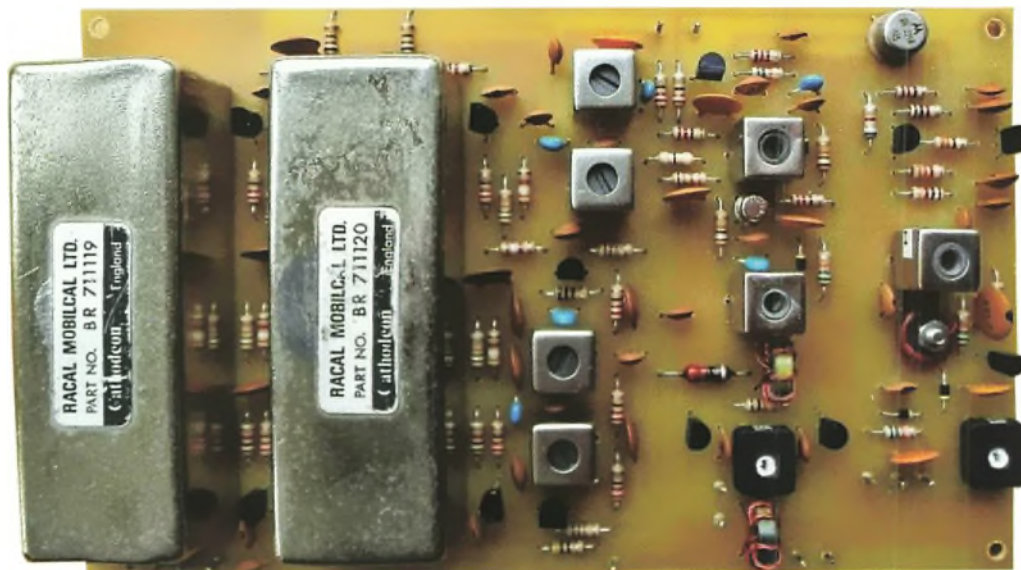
The 'front-end' board was assembled and, apart from a slight physical modification of holes, there were no other assembly issues.
